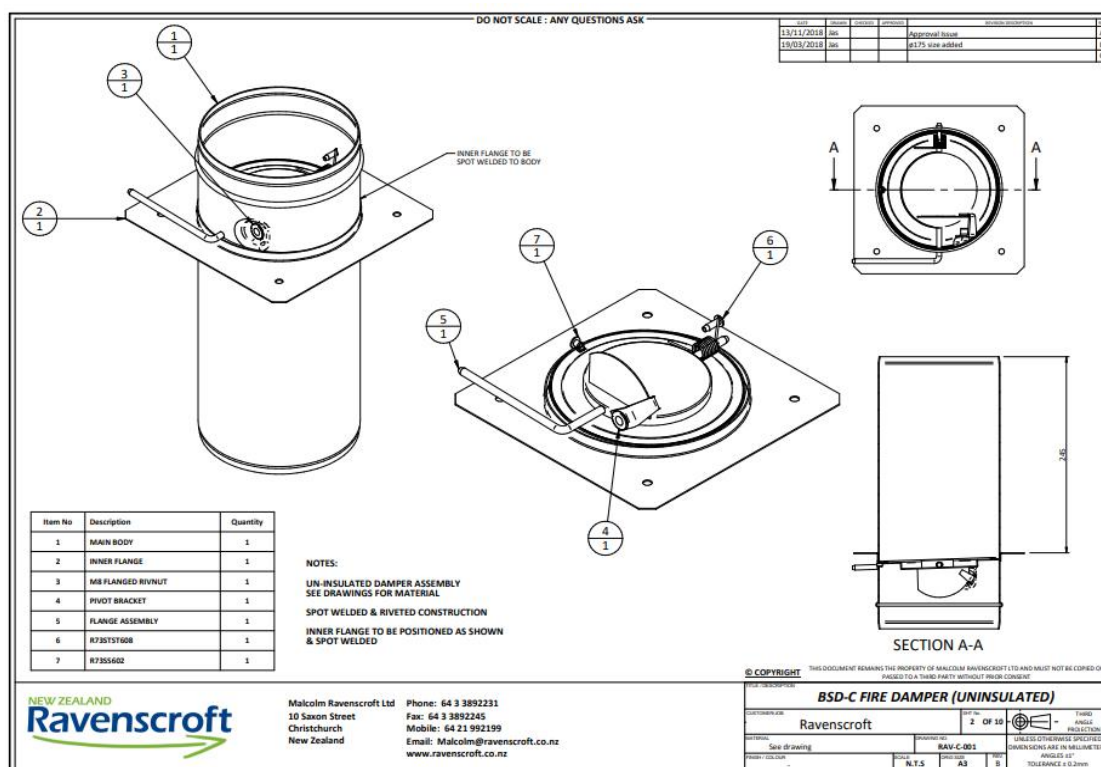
BSD-C uninsulated fire damper details – 2 (provided by Ravenscroft)
